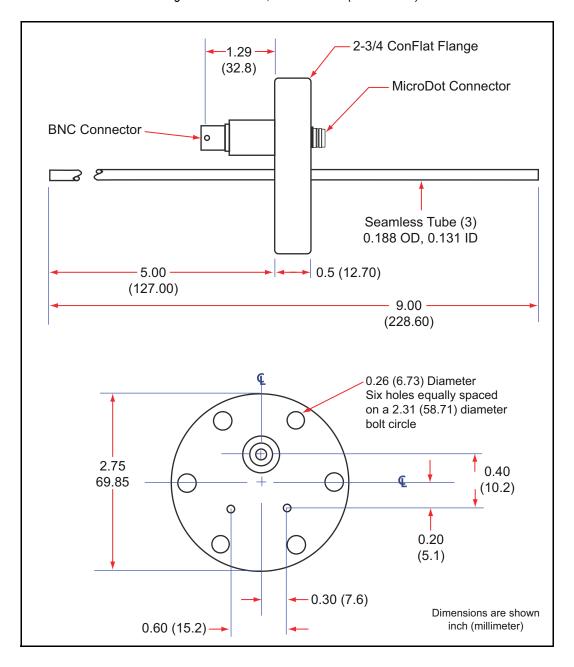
2-3/4 in. Conflat feedthrough with three tubes, one electrical (PN 750-685-G1)
